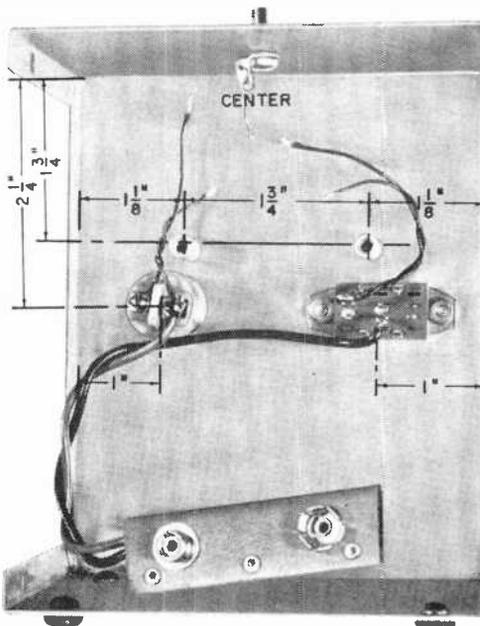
Prepare cabinet and mount parts as shown before installing completed board. Note terminal located between screw and washer on antenna post.
